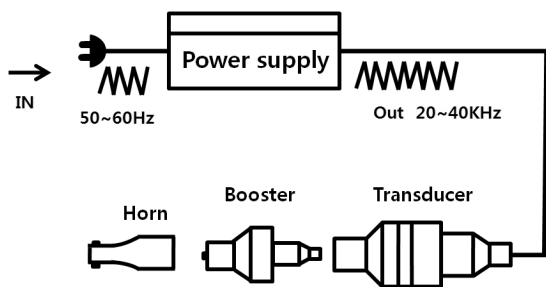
Structure of ultrasonic metal welding machine
